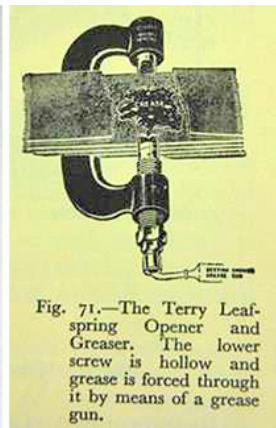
The Terry Leaf-spring Opener and Greaser. The lower screw is hollow and grease is forced through it by means of a grease gun.
